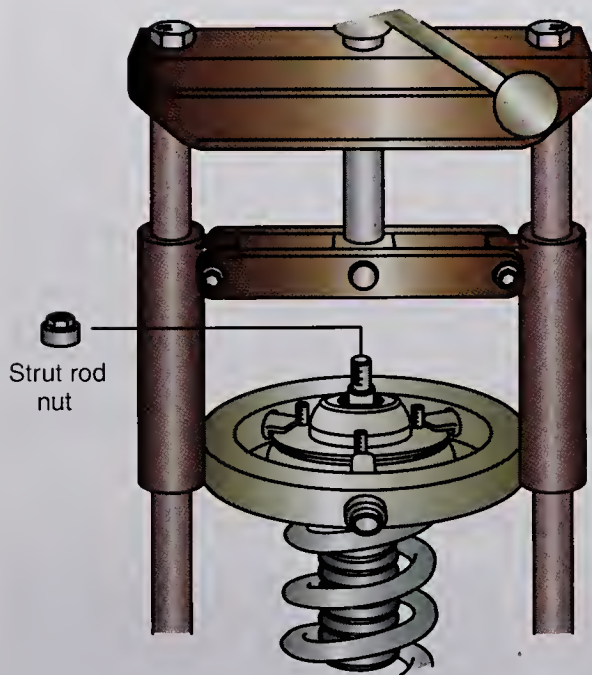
After the compressing tool is operated to remove all the spring tension, remove the strut rod nut.
